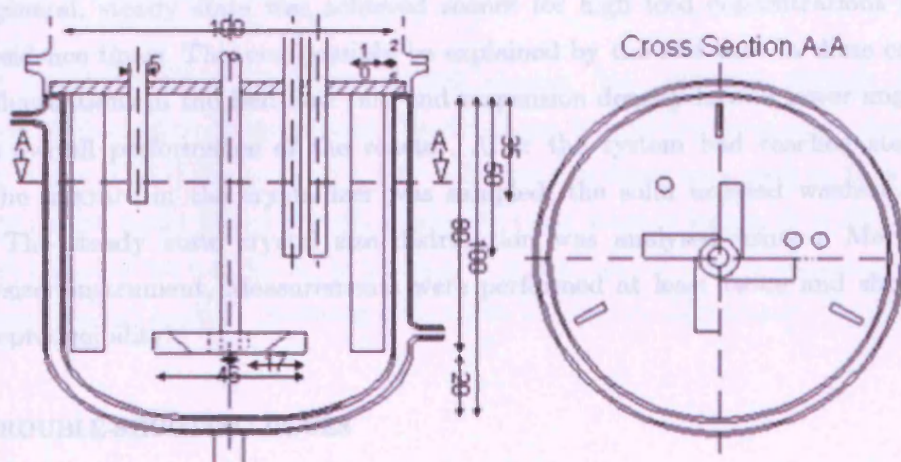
Mechanical drawing of MSMPR crystallizer including cross-sectional view (all dimensions given in mm).
